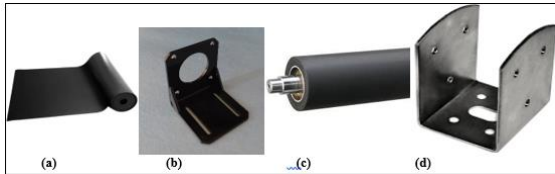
Mechanical parts of the 3D printing device (Doğuş Kalıp, 2019)
